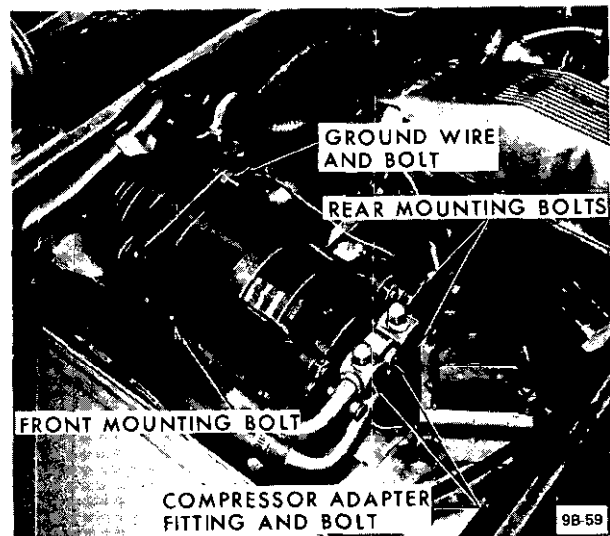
B-82 Compressor Adapter Fitting, Ground Wire, and Front and Rear Mounting Bolts • GT
